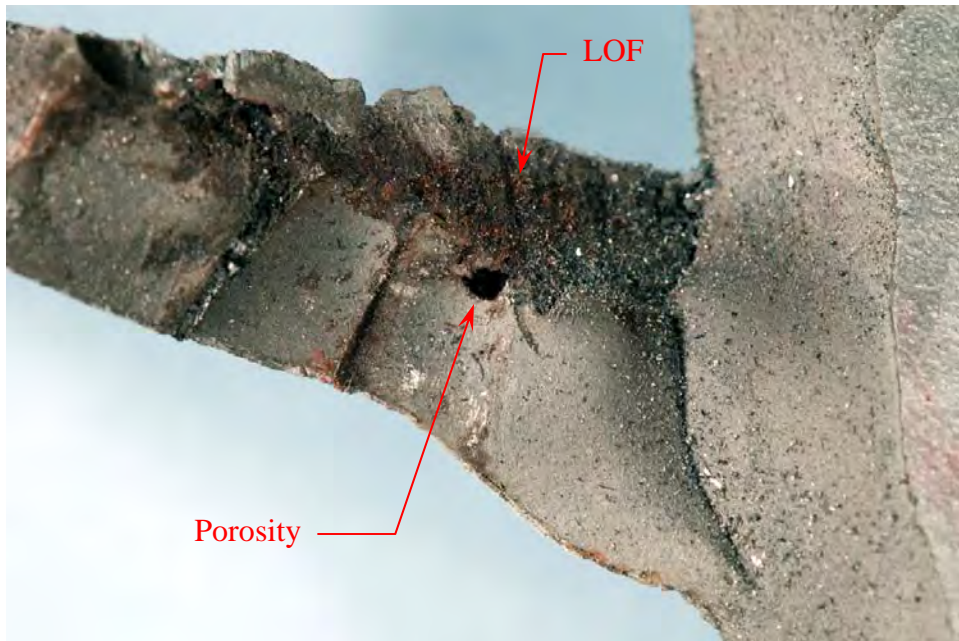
Fracture surface of hand hole frame to pole fillet weld revealing the origin of fatigue crack from the lack of fusion and porosity at the weld root
